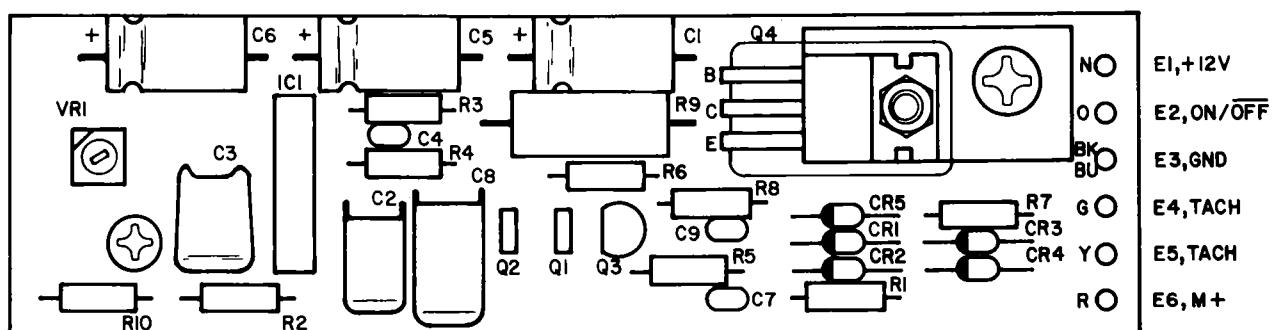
Drive motor servo circuit parts layout, Models 1540 and 1541.
